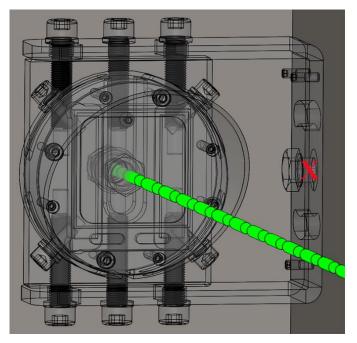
Drill a Hole at the Marked Spot – Optional Side Mount
